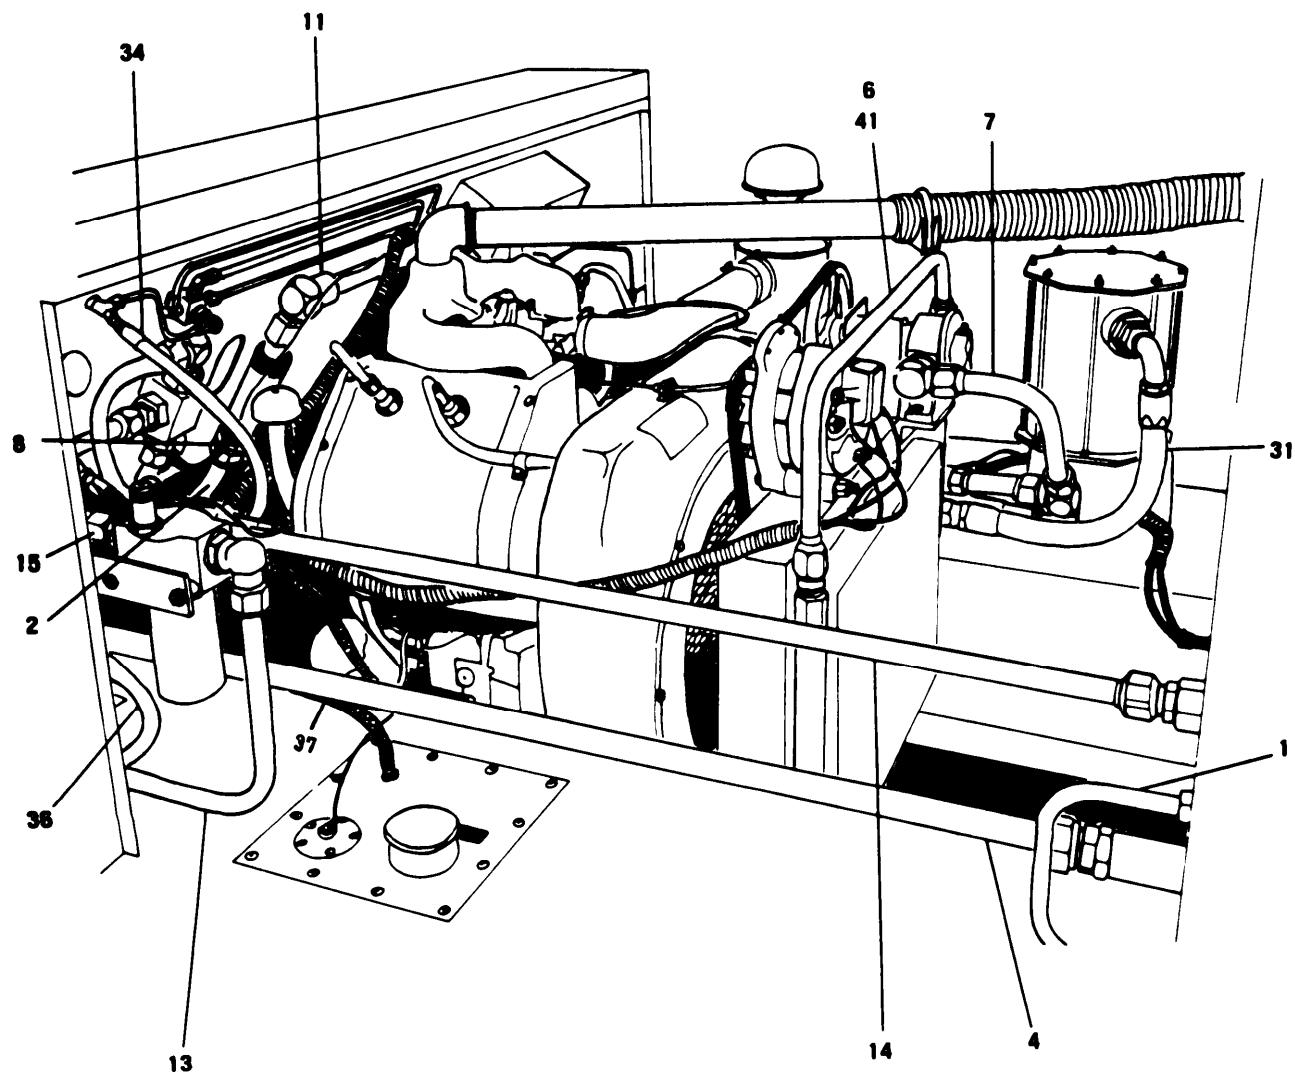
Lines, Tubing, Fitting and Hose Assembly (Sheet 1 of 3)
